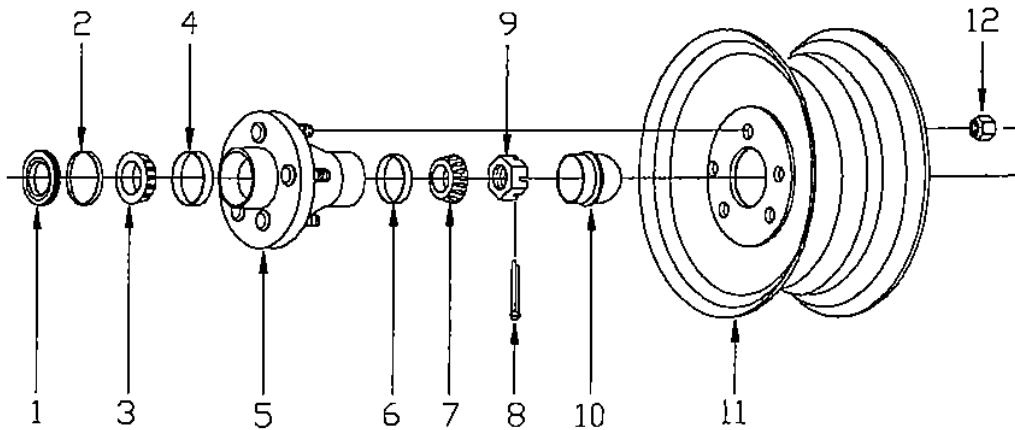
GAUGE WHEEL HUB COMPONENTS
